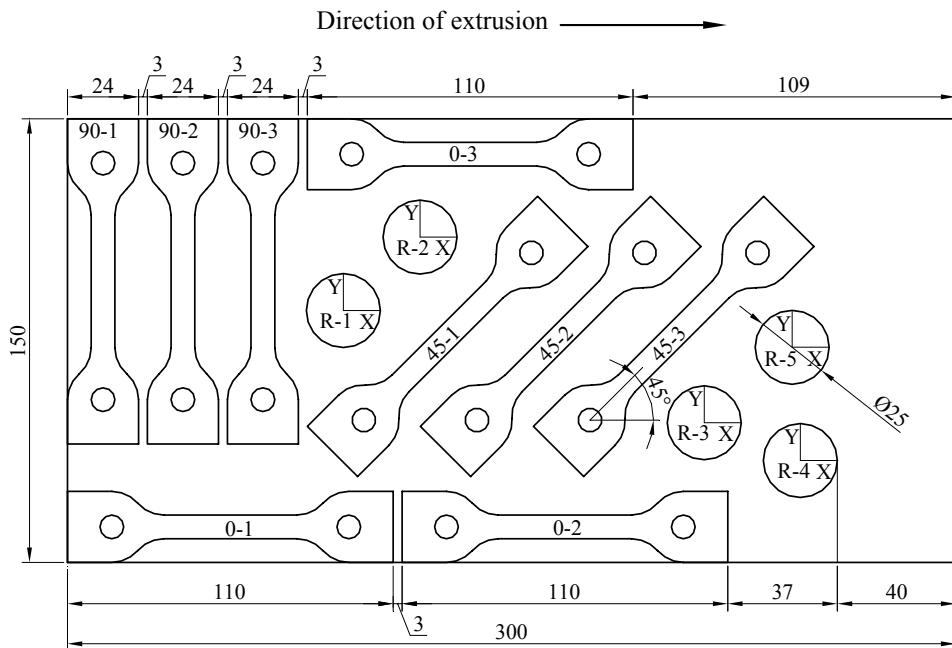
Specimens of uniaxial tensile tests and compression tests cut from the extruded sheet.
